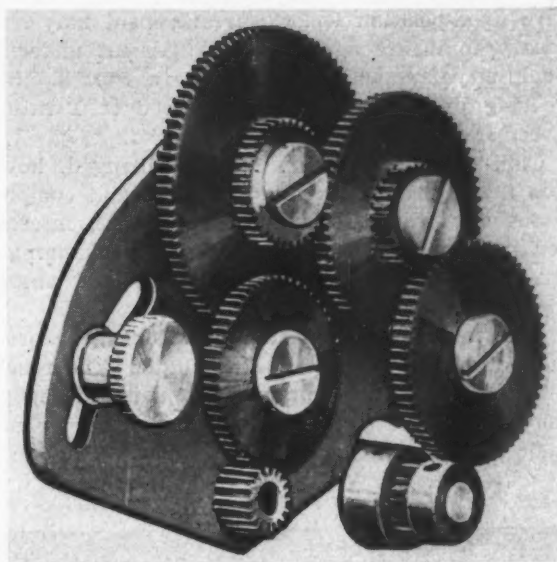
Below — Positive locking arrangement is provided for both of the sector gears shown at right front of this dual driving-motor timer
